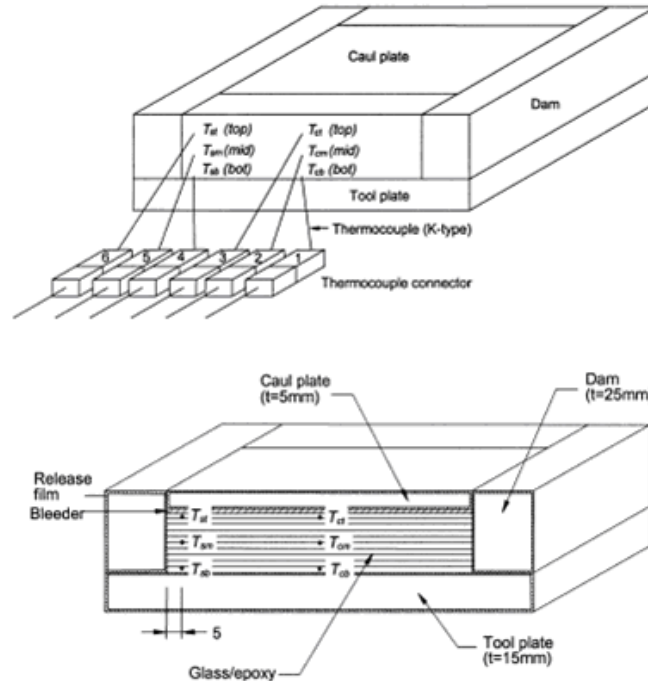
Schematic diagram of experimental setup. Mold assembly
